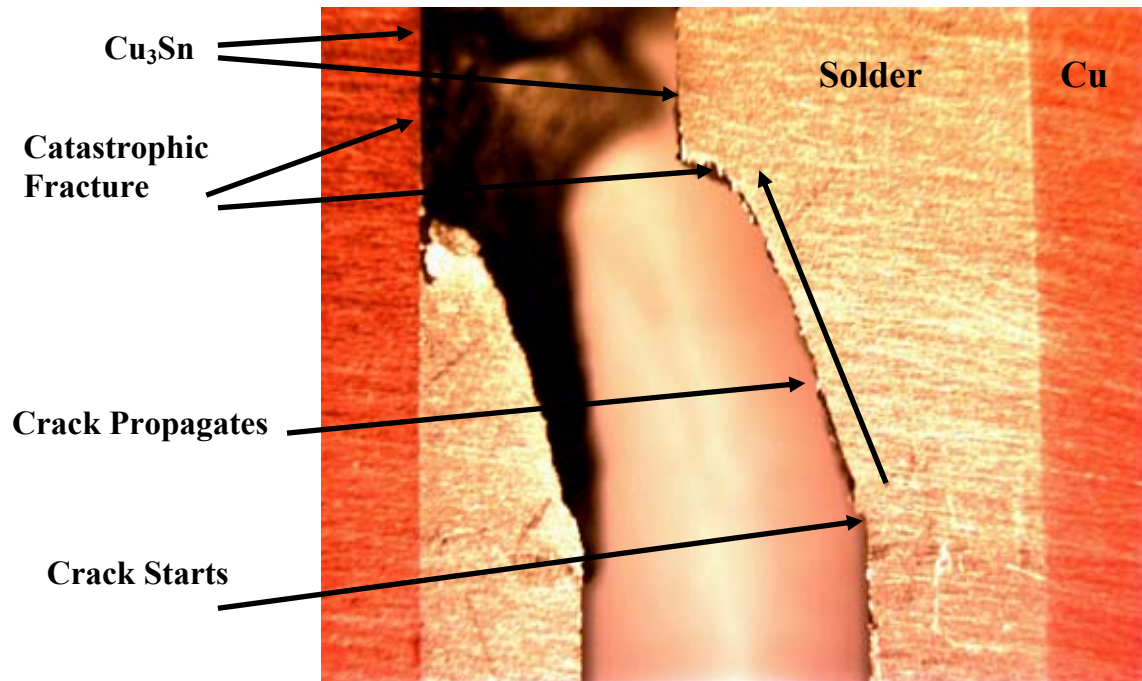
Fatigue Crack in Sn-3.5Ag Solder (two sides of crack are shown) Sample aged 10 minutes in liquid state (S. Vaynman 2007)
